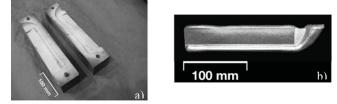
Tensile bar test mold and test bar; a) Hot work steel strip mold (1.2343); b) test bar with gate and overflow
